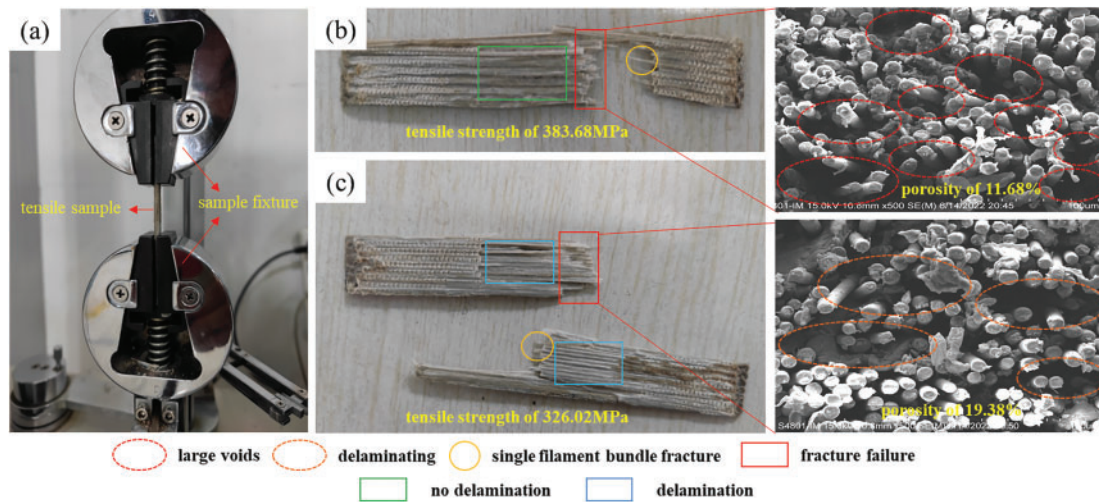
Fracture failure appearance of material samples before and after tensile test. (a) Before tensile test; (b) After tensile test (printing layer thickness 0.6 mm); (c) Specimen after tensile test (printing layer thickness 0.7 mm)
